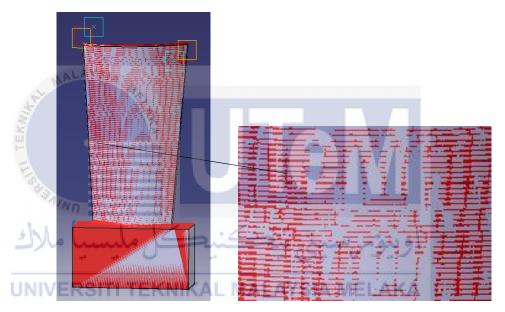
Comparison convex side of CAM and CAD model done by three axis machining
